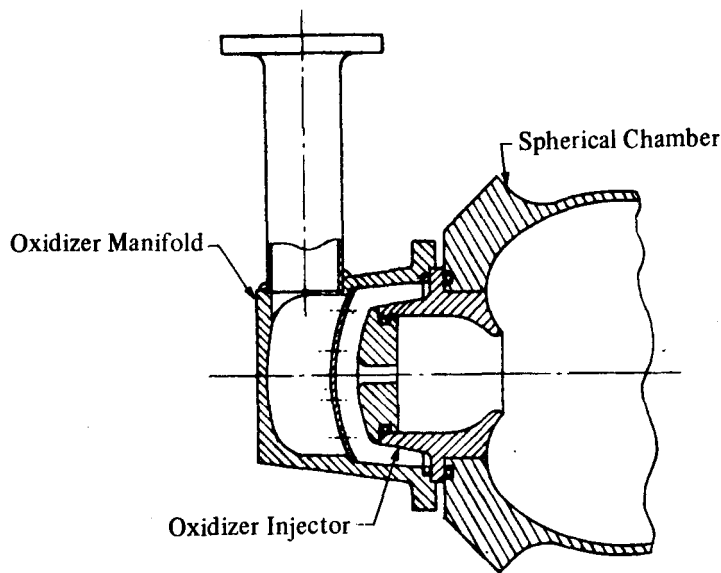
Oxidizer Injector Assembly and Manifold Assembly
